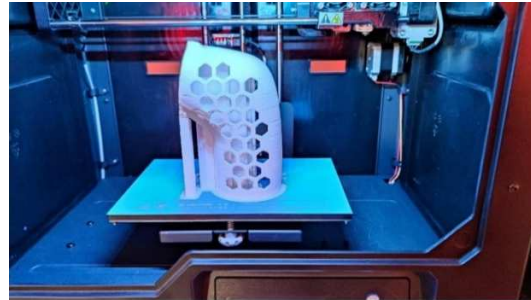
Wrist-hand orthosis manufactured with the Zortrax M200+ 3D printer
